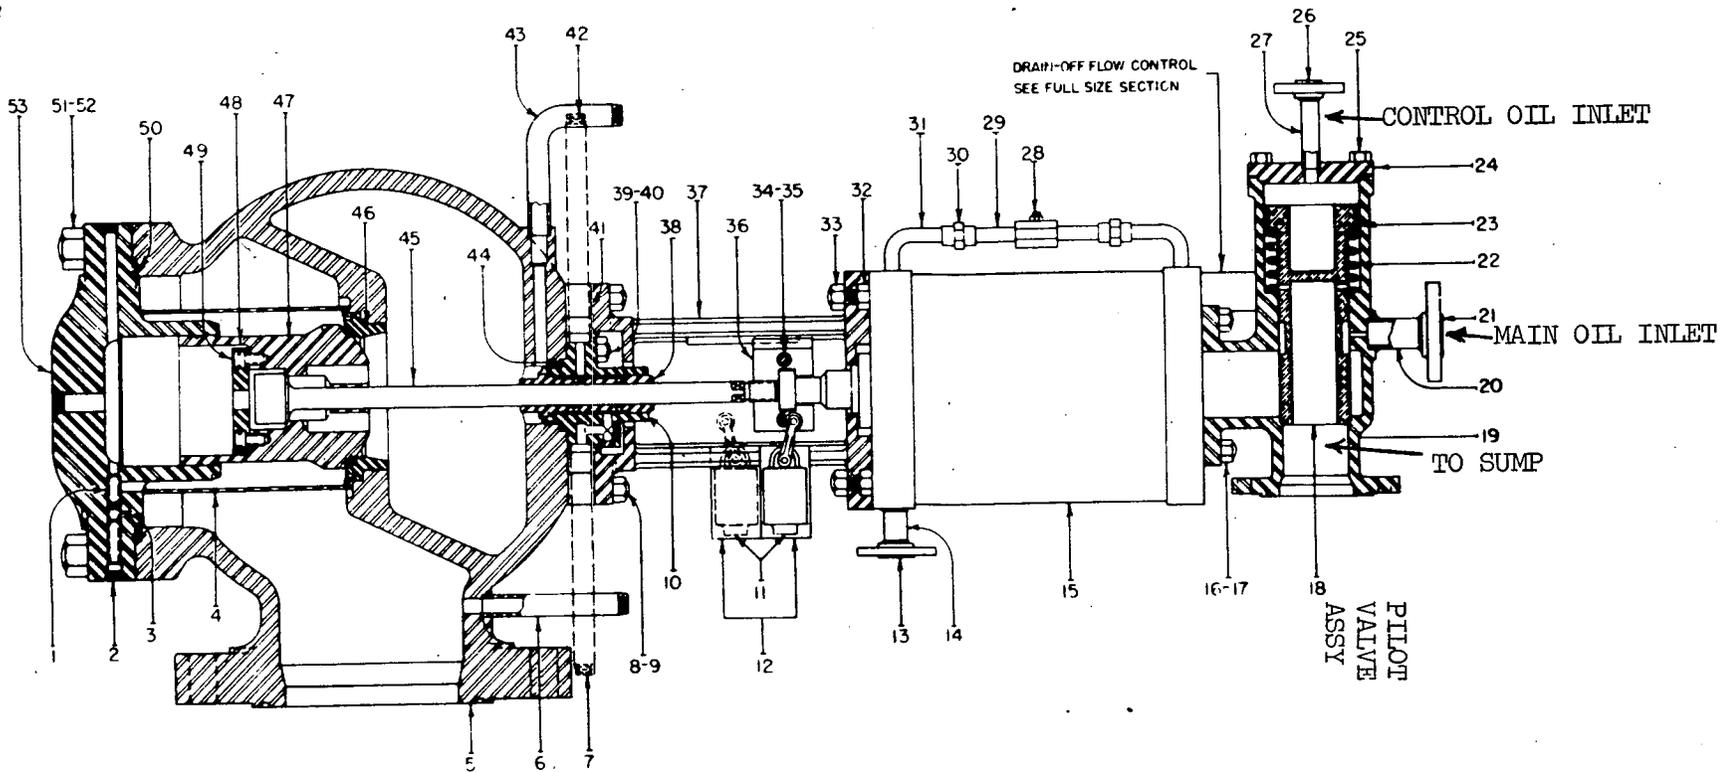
HPCI TURBINE STOP VALVE ASSEMBLY.
